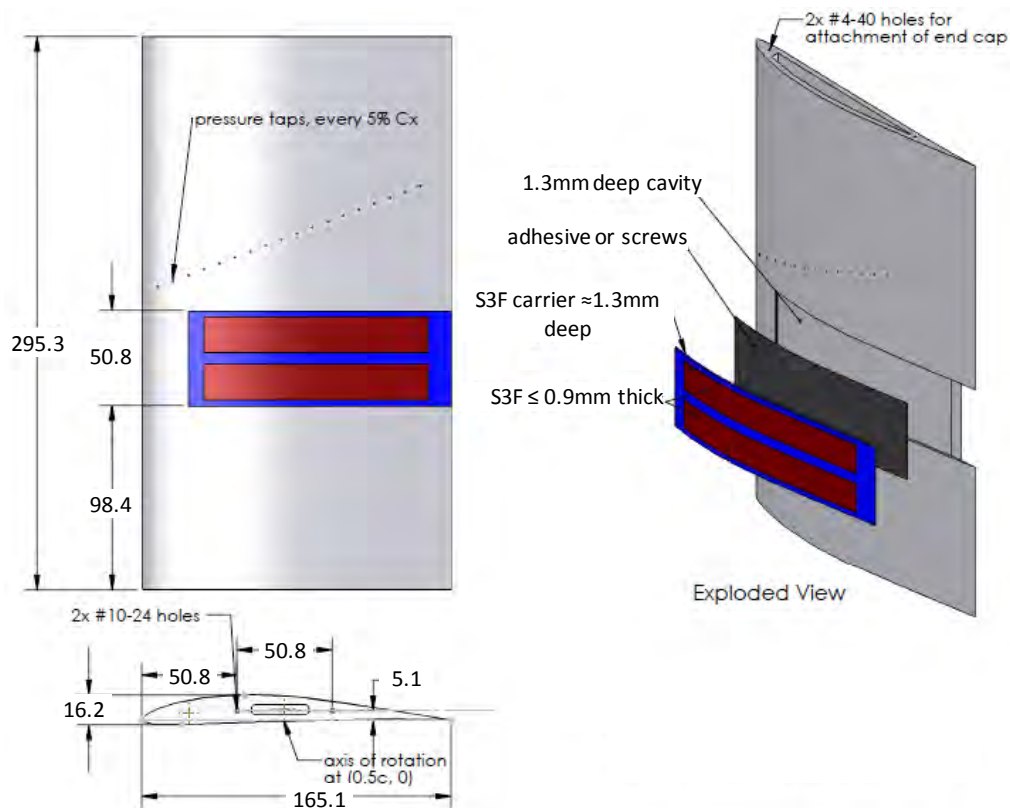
Drawing of Airfoil 2 showing the pressure tap locations and S3F location (all dimensions in millimeters).
